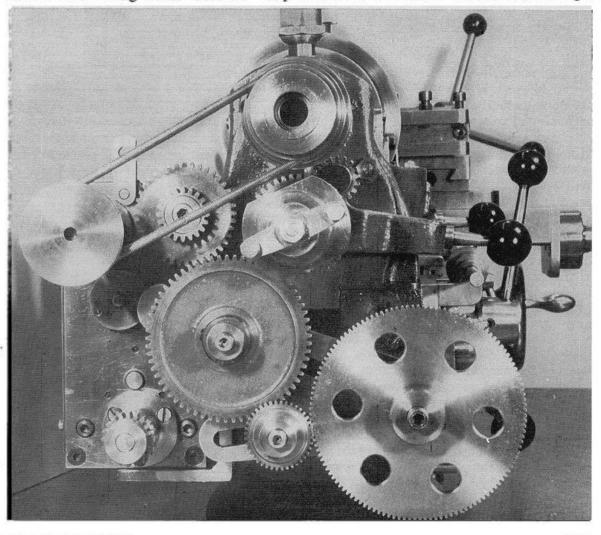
This view shows a 127T "translation" gear of reduced pitch. Here the quadrant is set to cut a 2 mm. pitch with gearing 40-65-20 40-127. The 40-127 wheels are 30 d.p.
